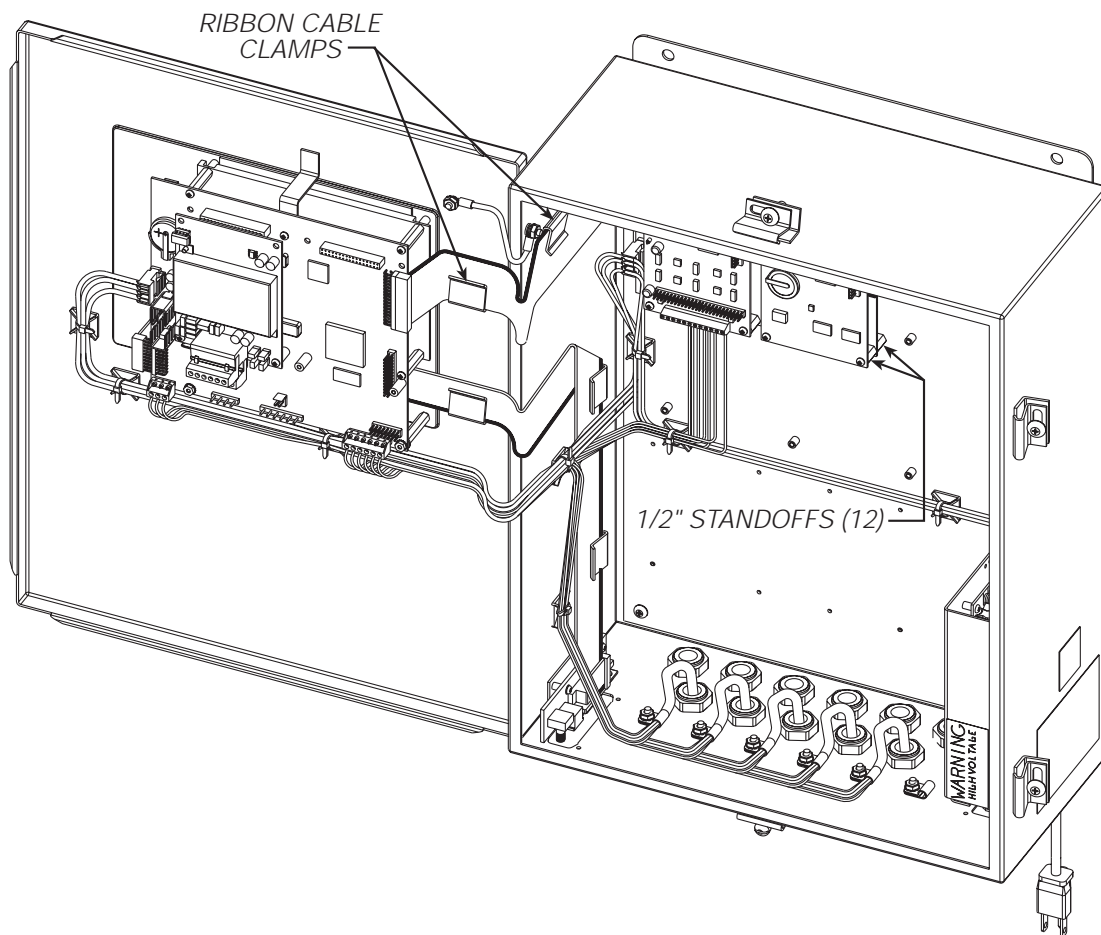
Two-Card Expansion Board Installed in Wall Mount Enclosure, Isometric View
